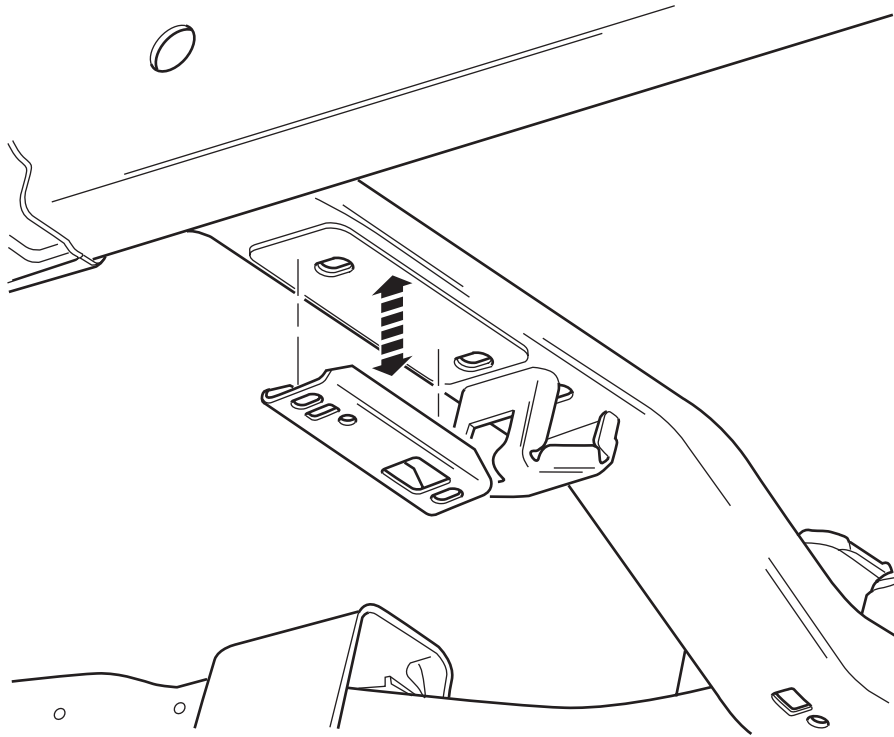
LOCATE CENTER BEARING BRACKET ON THE CROSSMEMBER
